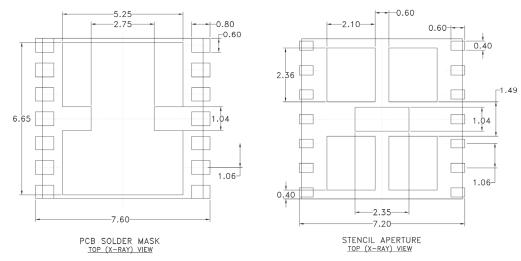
AWB7222 PCB Layout Footprint Dimensions
